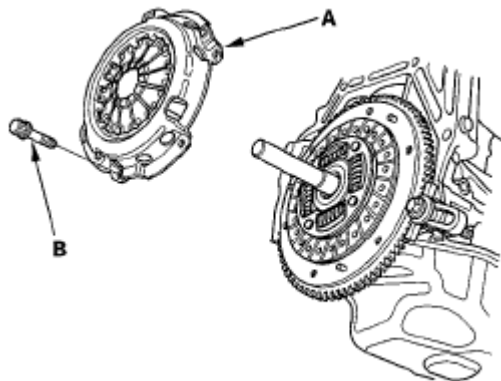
Identifying Pressure Plate And Mounting Bolts
